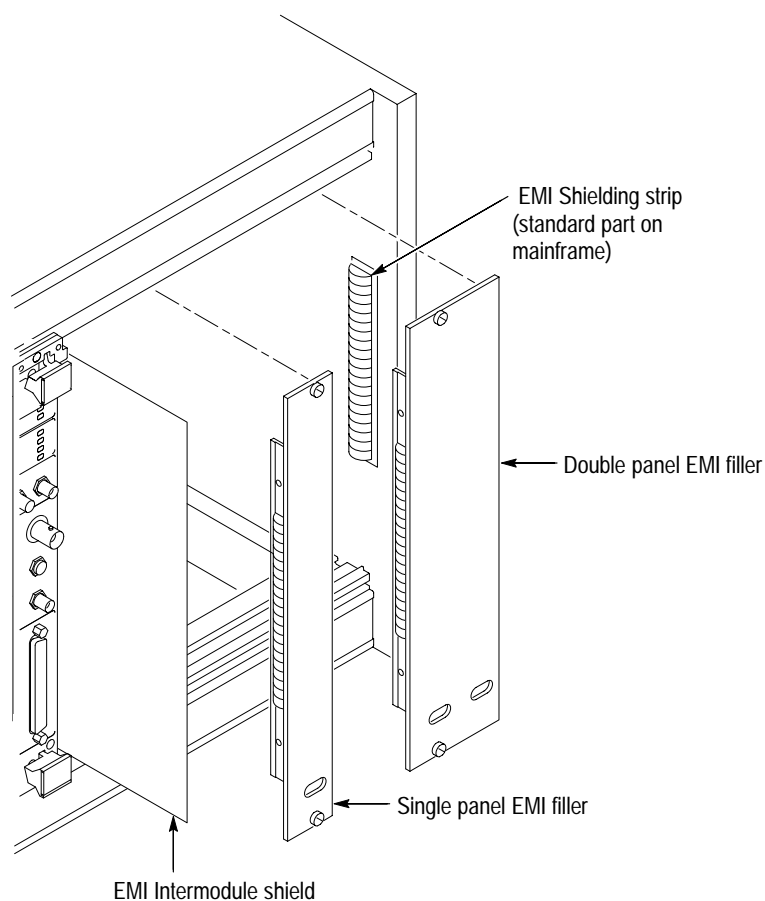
Installing the EMI intermodule shield and front panel EMI fillers
